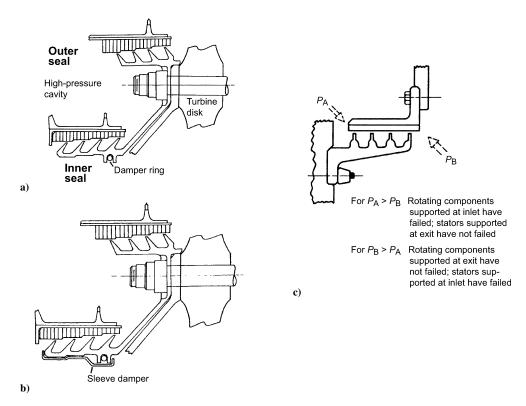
Inner and outer labyrinth air seals: a) damper ring, b) damper drum (sleeve),65 and c) effect of seal component support.4
